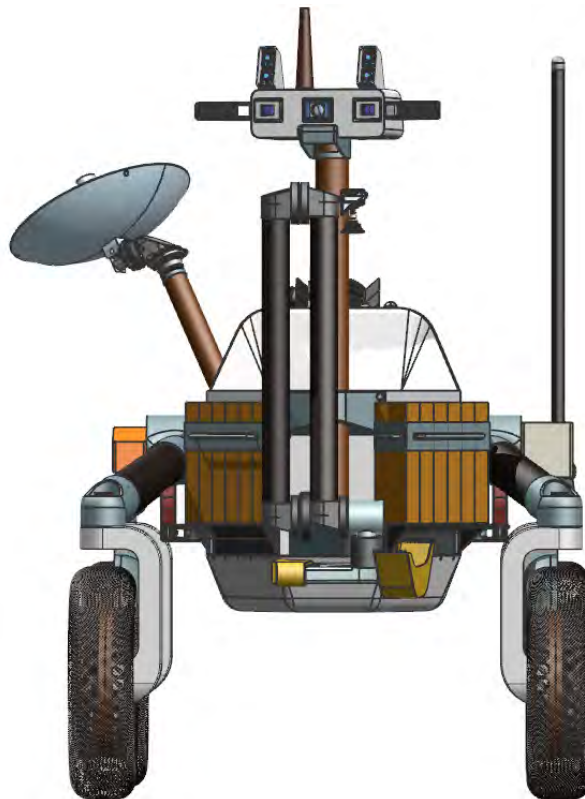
Front view of the rover with the camera head, robotic arm, and sample canisters.
